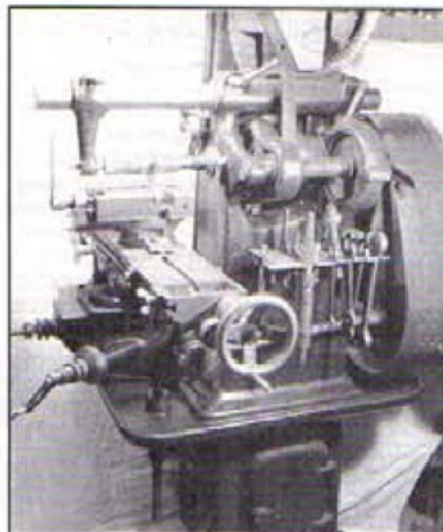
Arno Brown & Sharpe type universal milling machine, c1912.
